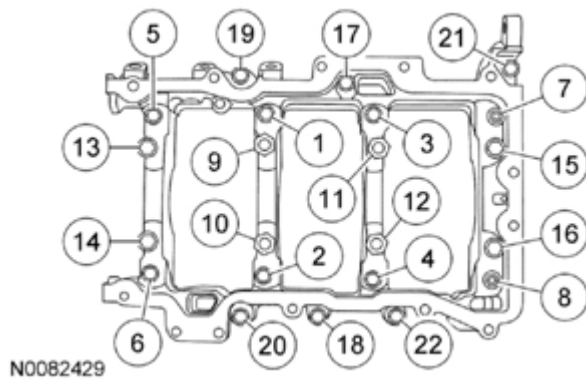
Identifying Lower Cylinder Block Bolts And Studs Tightening Sequence
